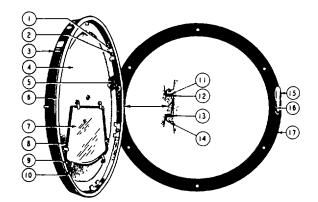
Figure 84376 Assembly M0117HT - For Recorder or Concentric Indicator Assembly M0117PA - For Recorder or Concentric Indicator with Shatterproof Glass Assembly M0117NA - For Sector Indicator Assembly M0117PW - For Instrument with Closed Front
